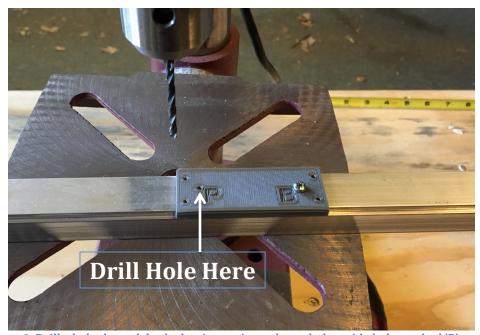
Drill a hole through both aluminum pieces through the guide hole marked 'P'
